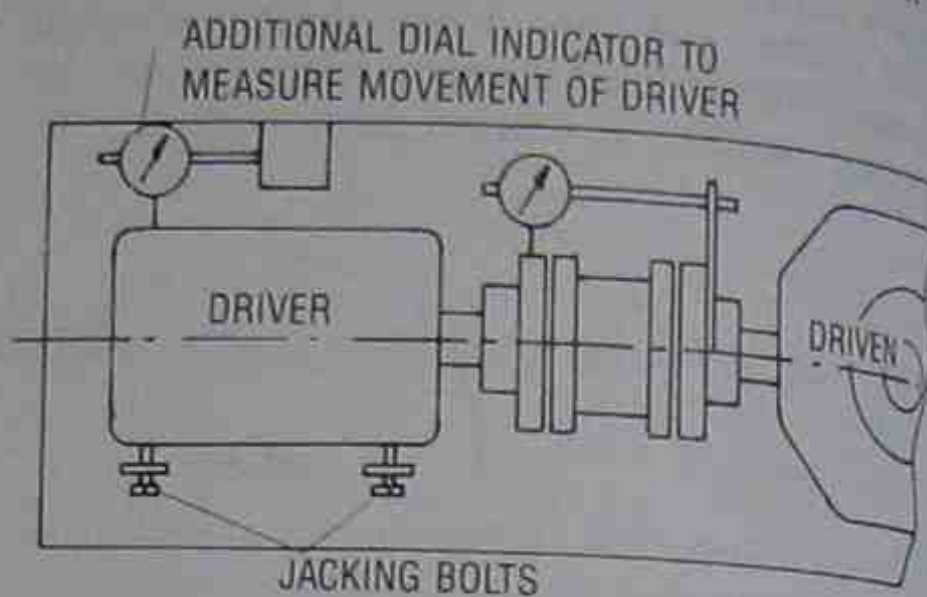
Measuring movement of the machine with an extra dial indicator.
